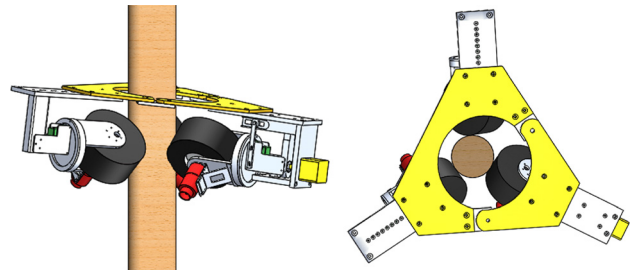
Passive anti-falling mechanism: lateral view and top view
